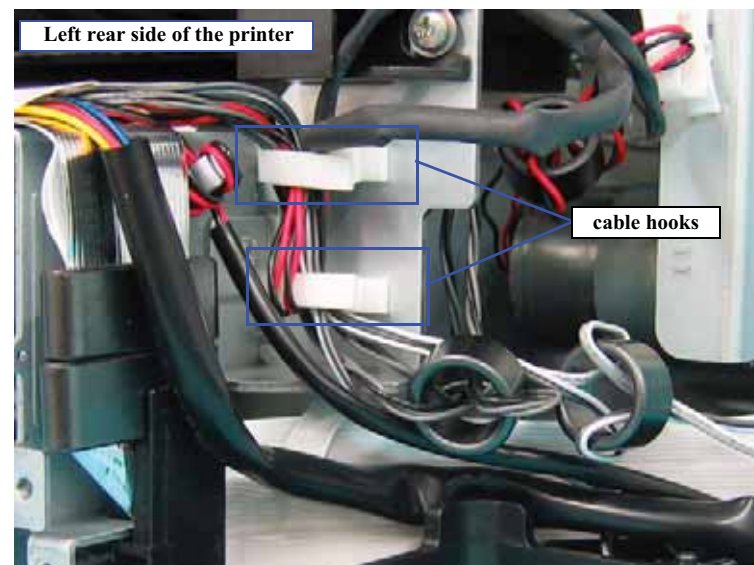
Releasing the MOTOR, RELEASE, ASSY. Cables (2)
